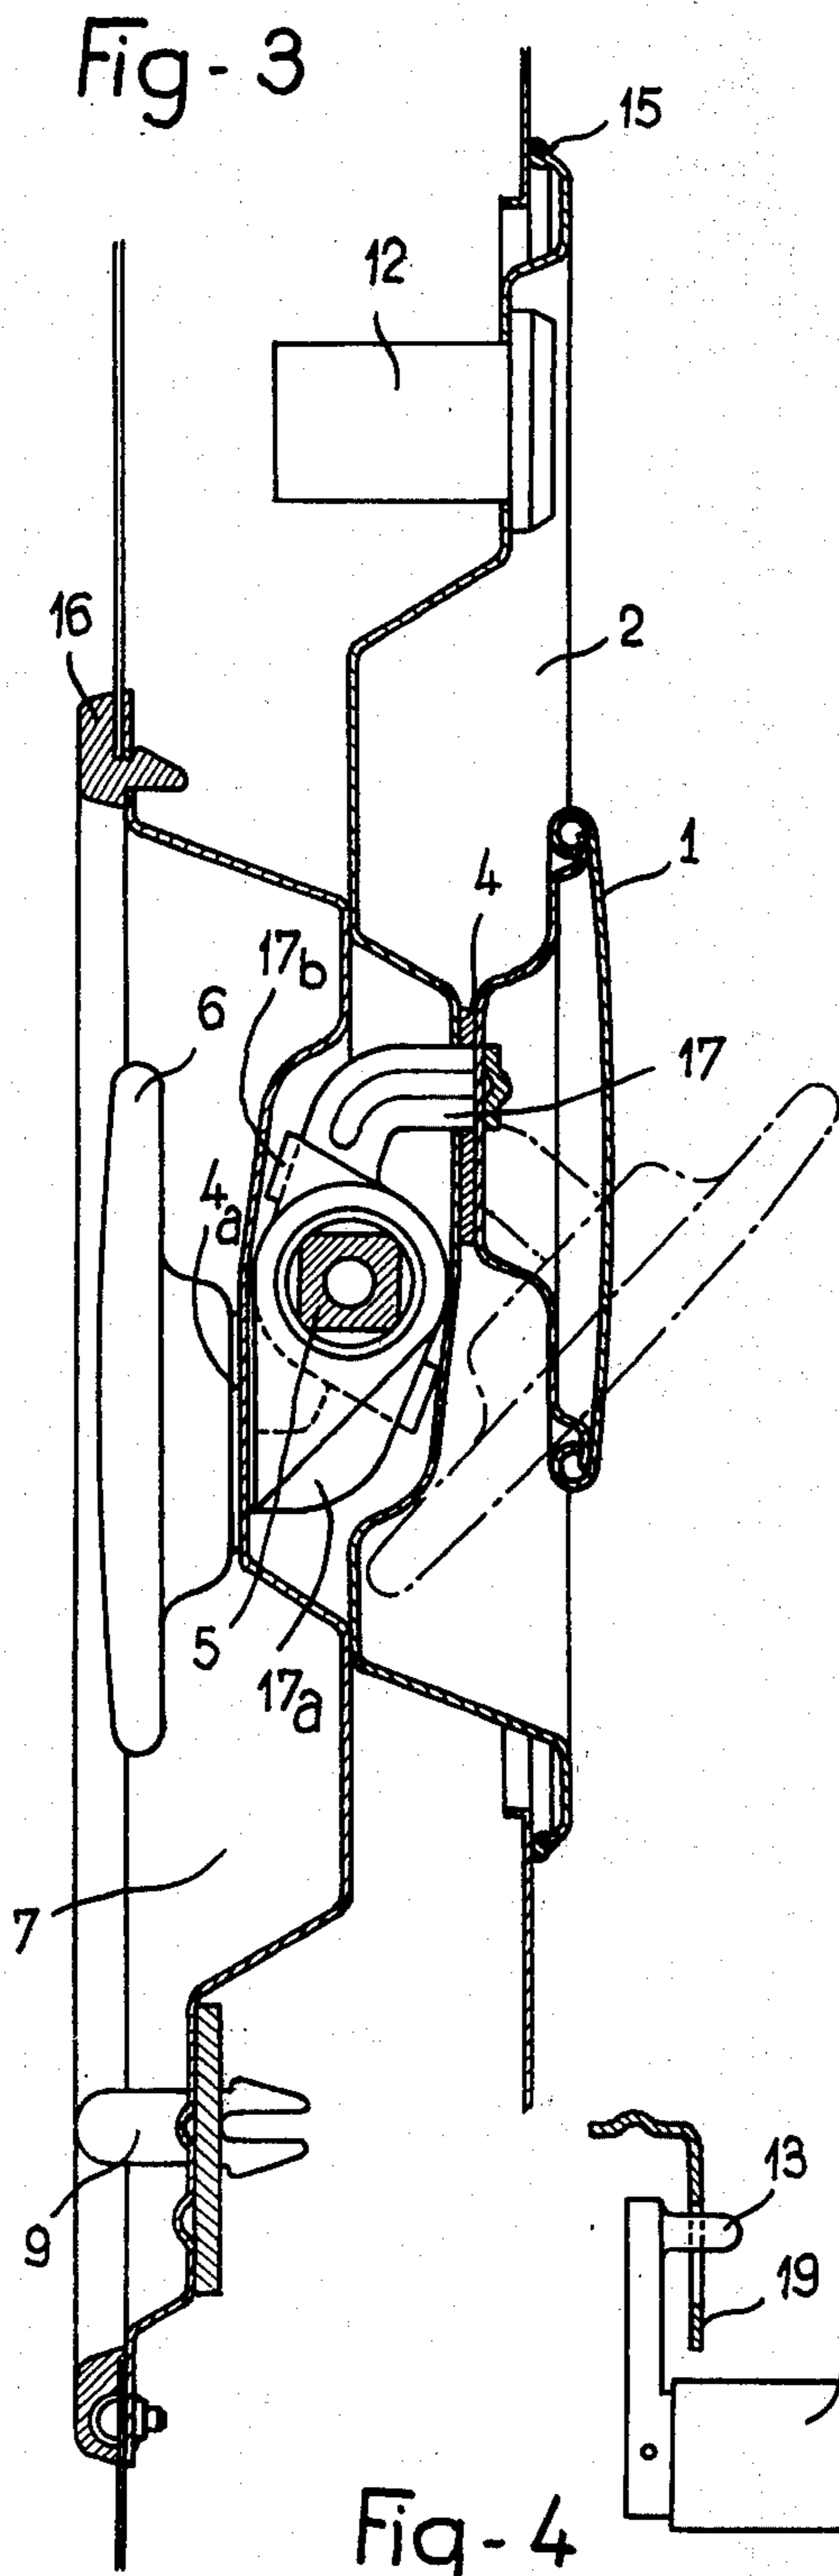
PLATE-TYPE DOOR OPENING CONTROL DEVICE
